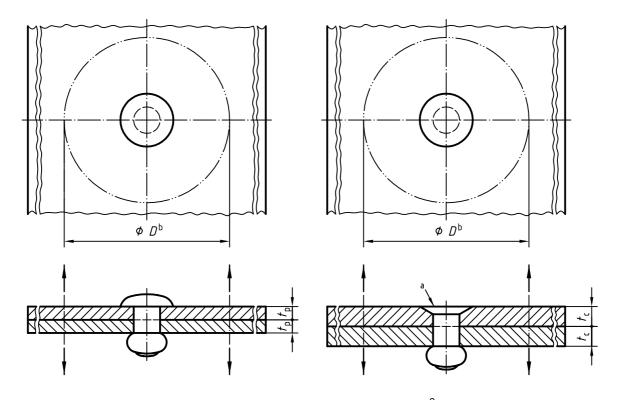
Test fixture with riveted test assembly for referee shear testing
